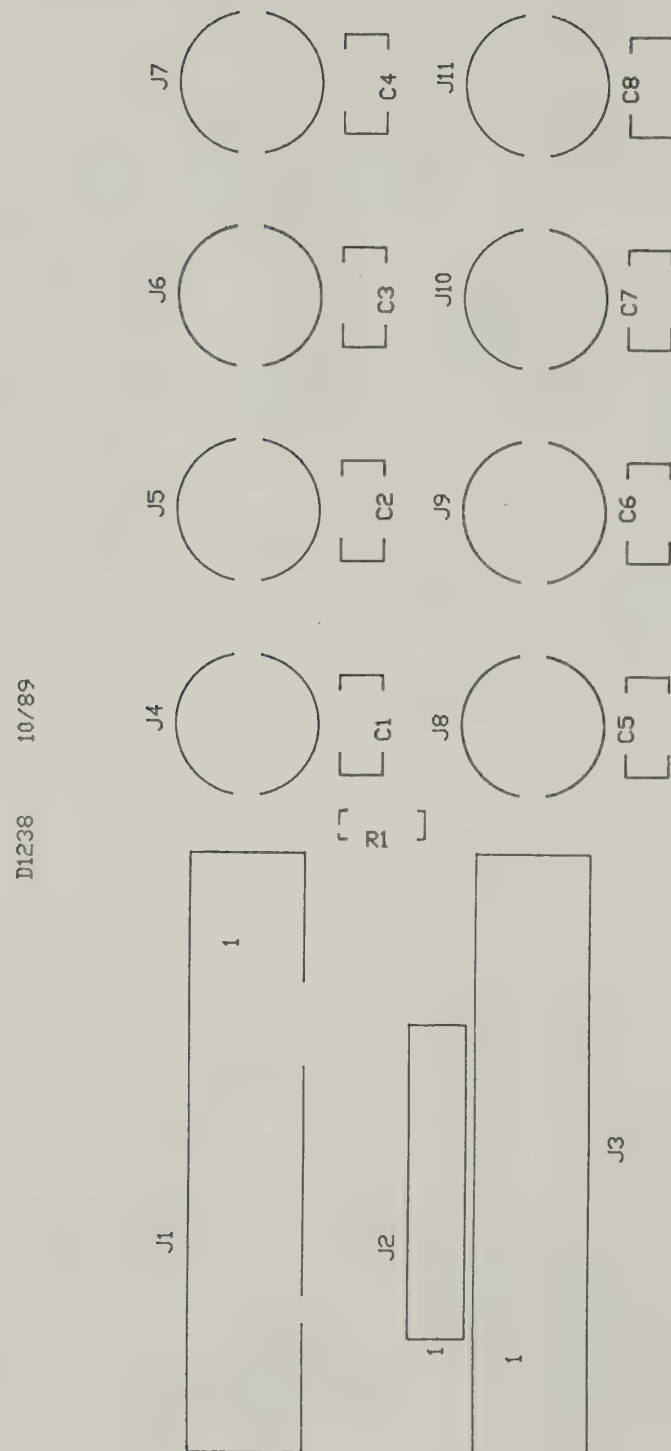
SPT-2 Rear Panel Circuit Board Parts Placement
